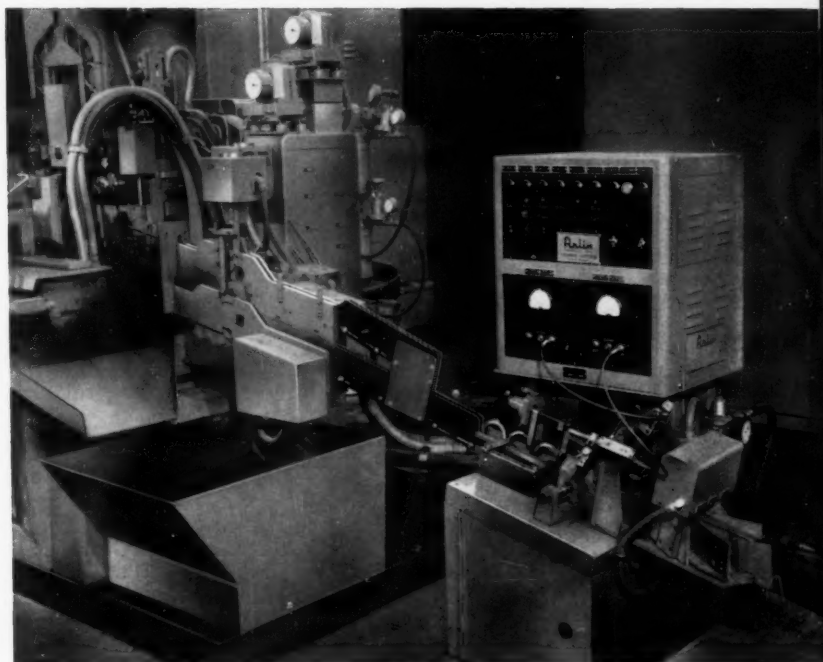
Electronic gage seen at right checks the chamfers on gear blanks and ejects unsatisfactory parts from the production line.
